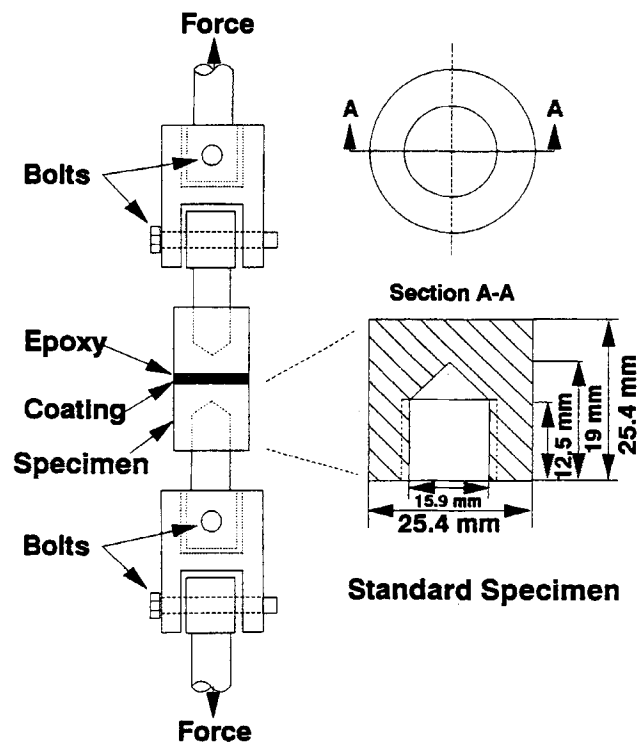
ASTM C633-79 self-aligning test fixture and specimen.
